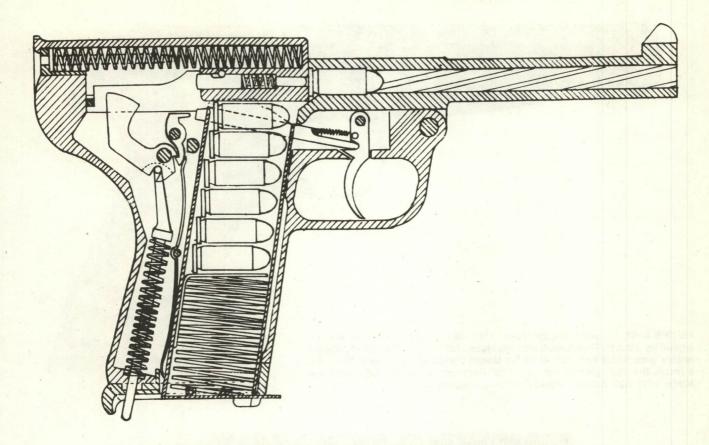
An August 1910 drawing of the Schouboe pistol mechanism. (Tøjhusmuseet)
